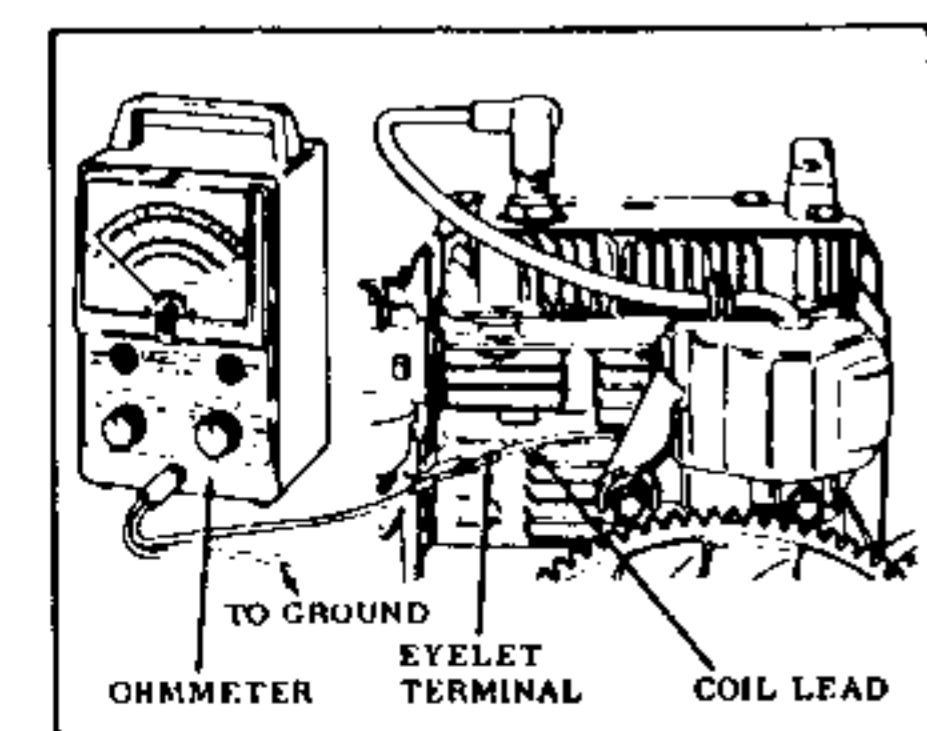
View showing ohmmeter connected for resistance test of ignition generator coil.
